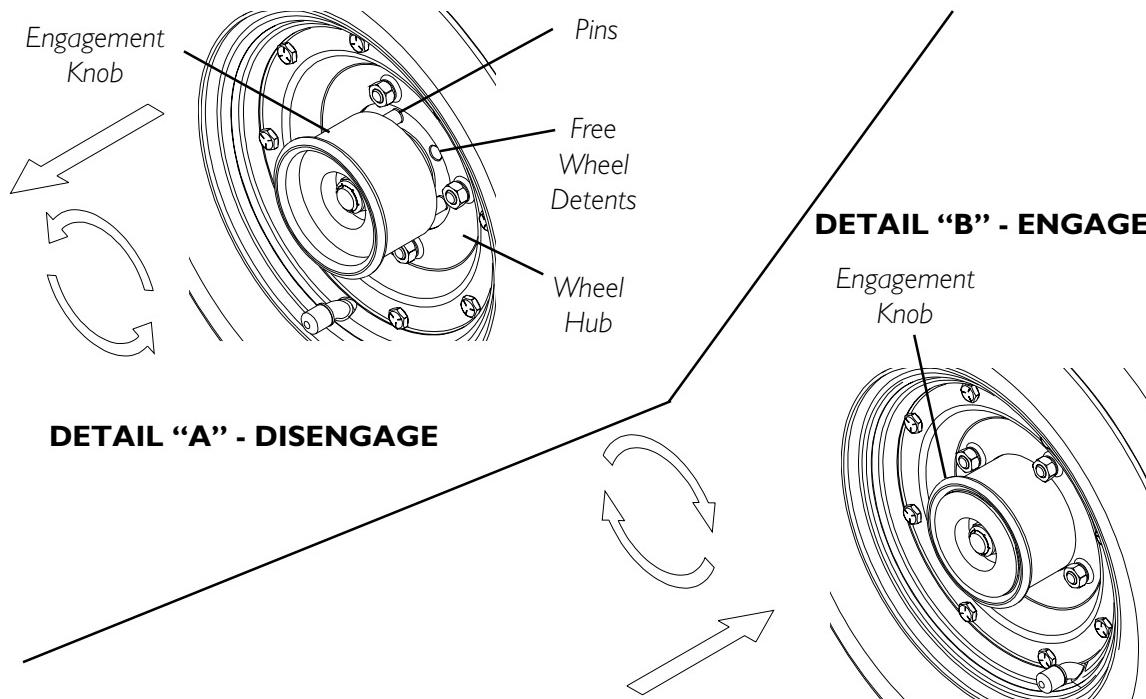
USING OPTIONAL WHEEL HUBS- INSTALLING *WHEEL LOCKS
